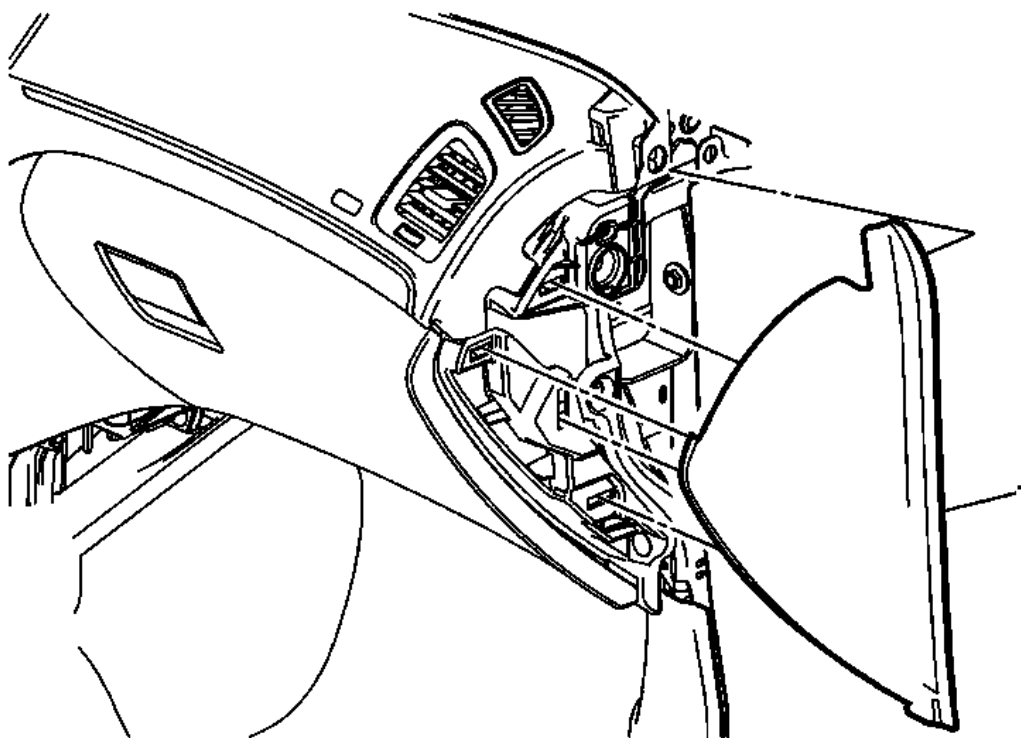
Instrument Panel Outer Trim Cover - Right Side
